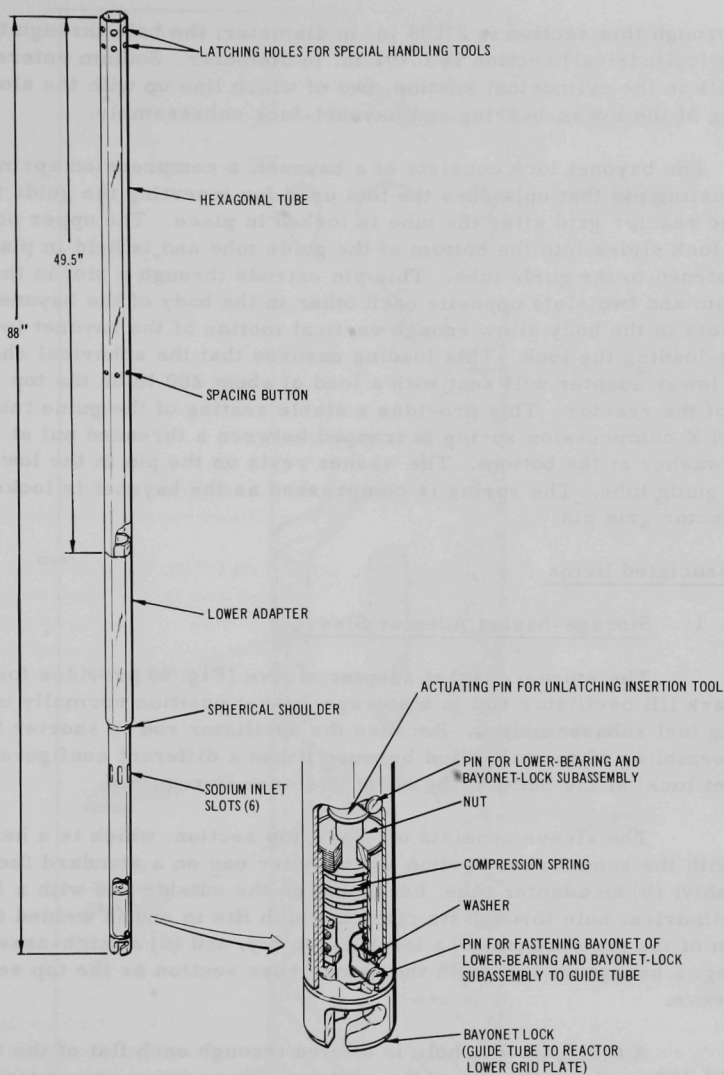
Guide-tube Assembly of Mark IIB Oscillator Rod
